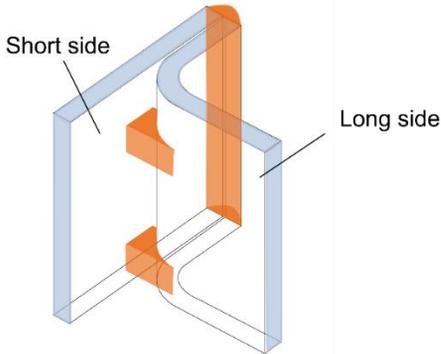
Welding between the short side and the long side, welds are highlighted in orange
